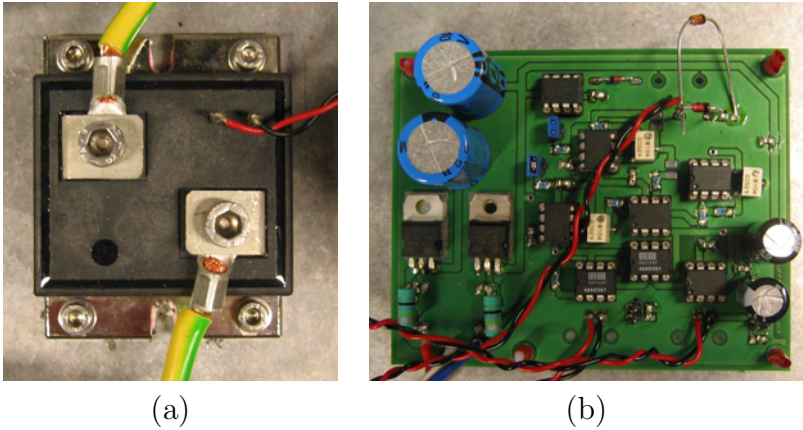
(a) the sensing resistor and (b) the assembled board.
